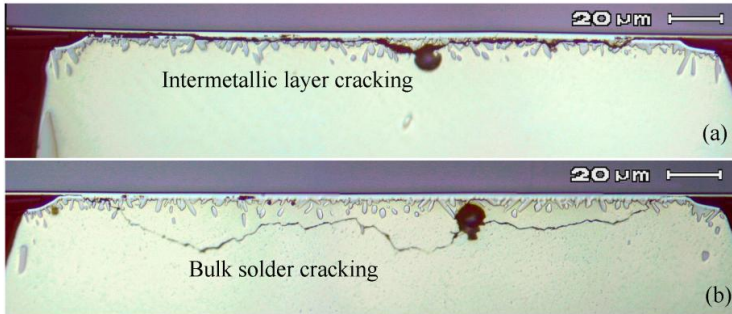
Failure modes of WL-CSP gradually change from the intermetallic layer cracking to the bulk solder cracking: (a) failure mode at RT; (b) failure mode at 100 °C. (reprinted with permission from Elsevier)
